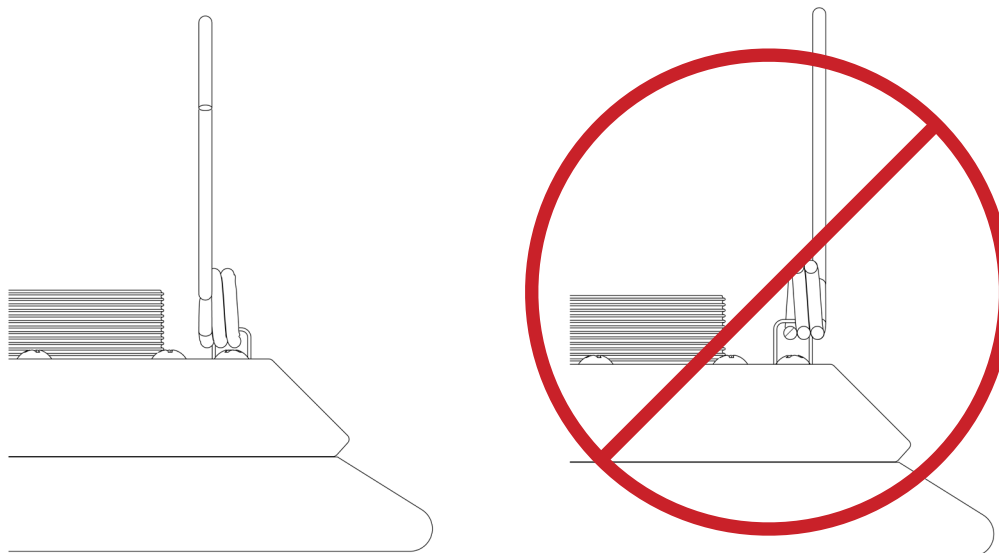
TORSION SPRING INSTALLED INTO PANEL
